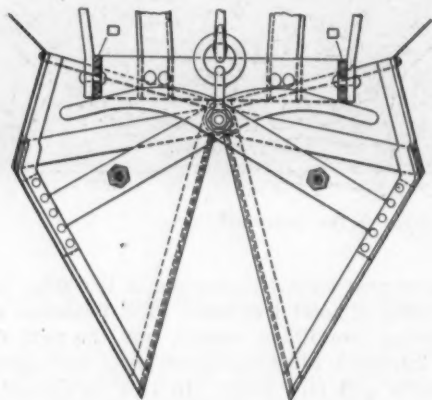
The Bucket Raised by the Crane and Dumping.
